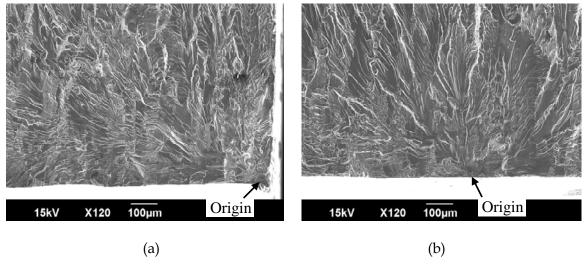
Examples of crack origins in non-cold expanded specimens: (a) at the hole corner, and (b) in the bore of the hole.
